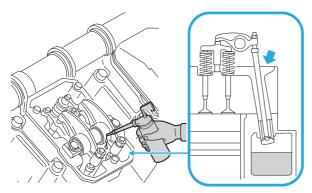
Engine Oil - Apply (Camshaft Oil Bath)
